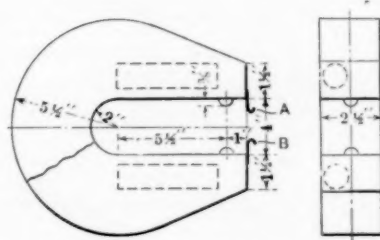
DIMENSIONS OF TEST SPECIMENS
